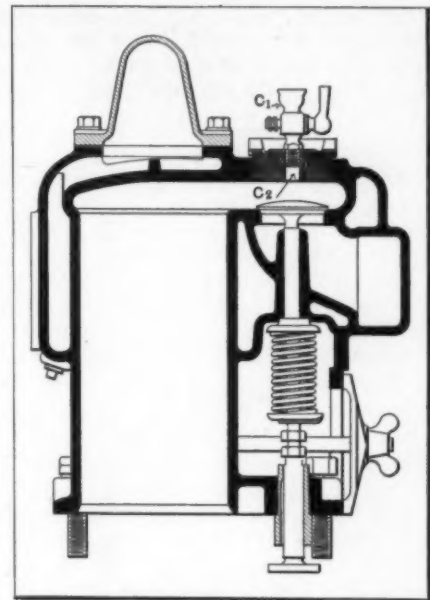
Section of an L-type cylinder showing a cavity in the valve cover due to the short-threaded portion of the priming cock screwed into same.
